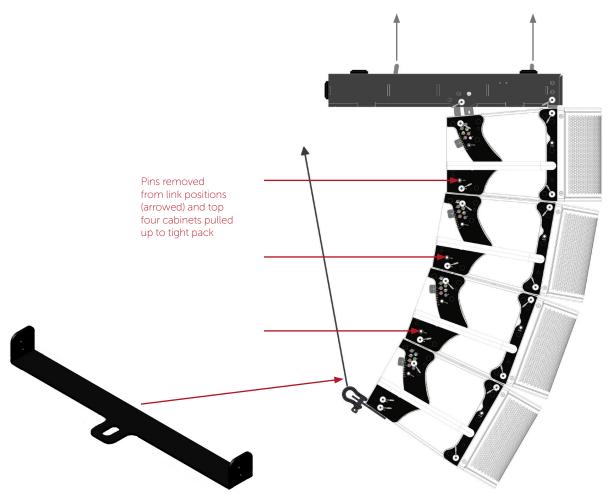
First four cabinets after steps 1 – 6 have been completed Rear bridle assembly - attach to rear of bottom cabinet
